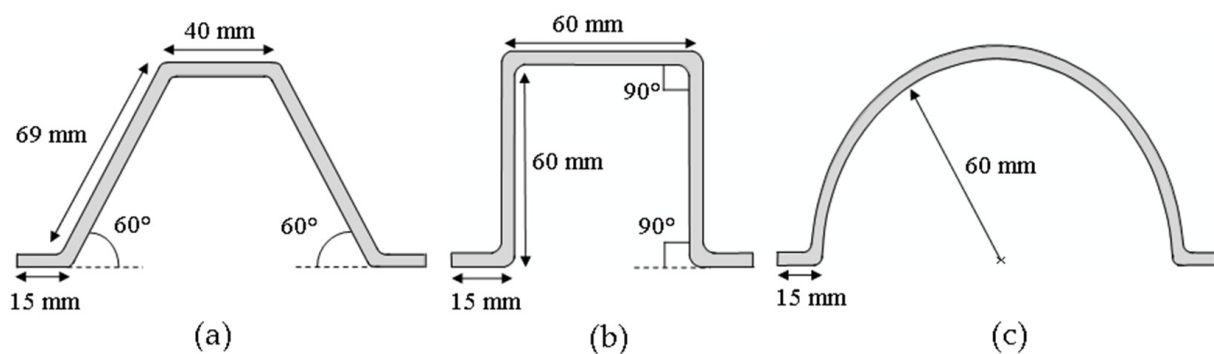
The frontal view of the self-supporting web specimens (a) 60° hat-shaped (b) 90° hat shape (c) half-sine hat shape.
